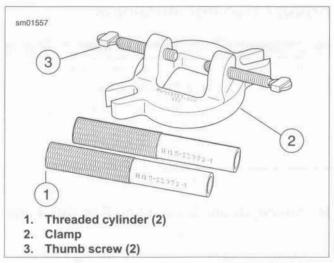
Connecting Rod Clamping Tool (Part No. HD-95952-33C)
